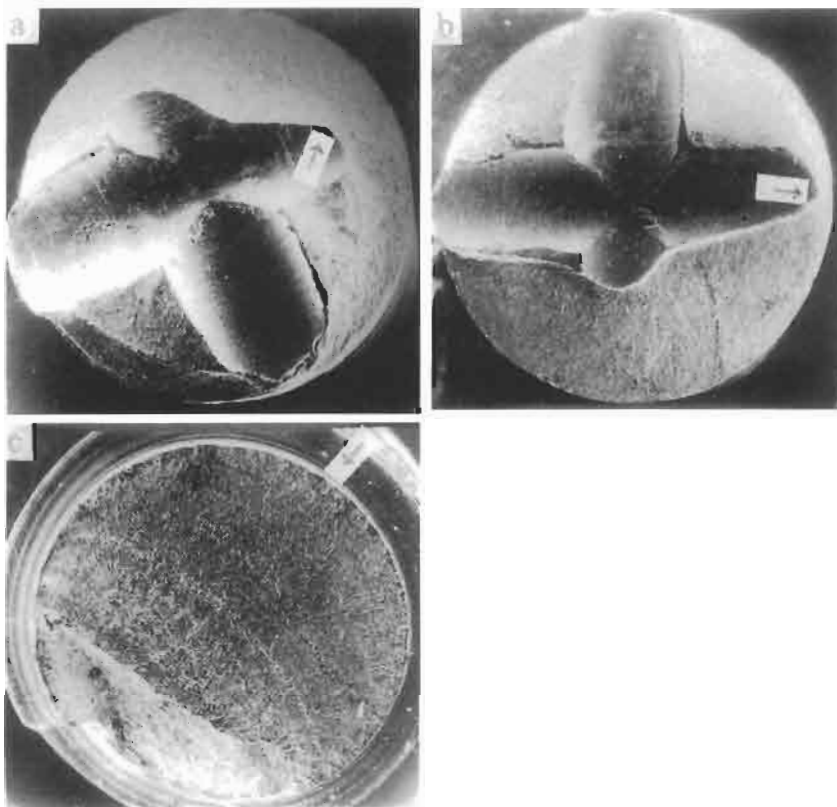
Fracture surfaces of bolts. (a) 1#; (b) 2#; (c) 3#. Fracture origins are marked with an arrow.
